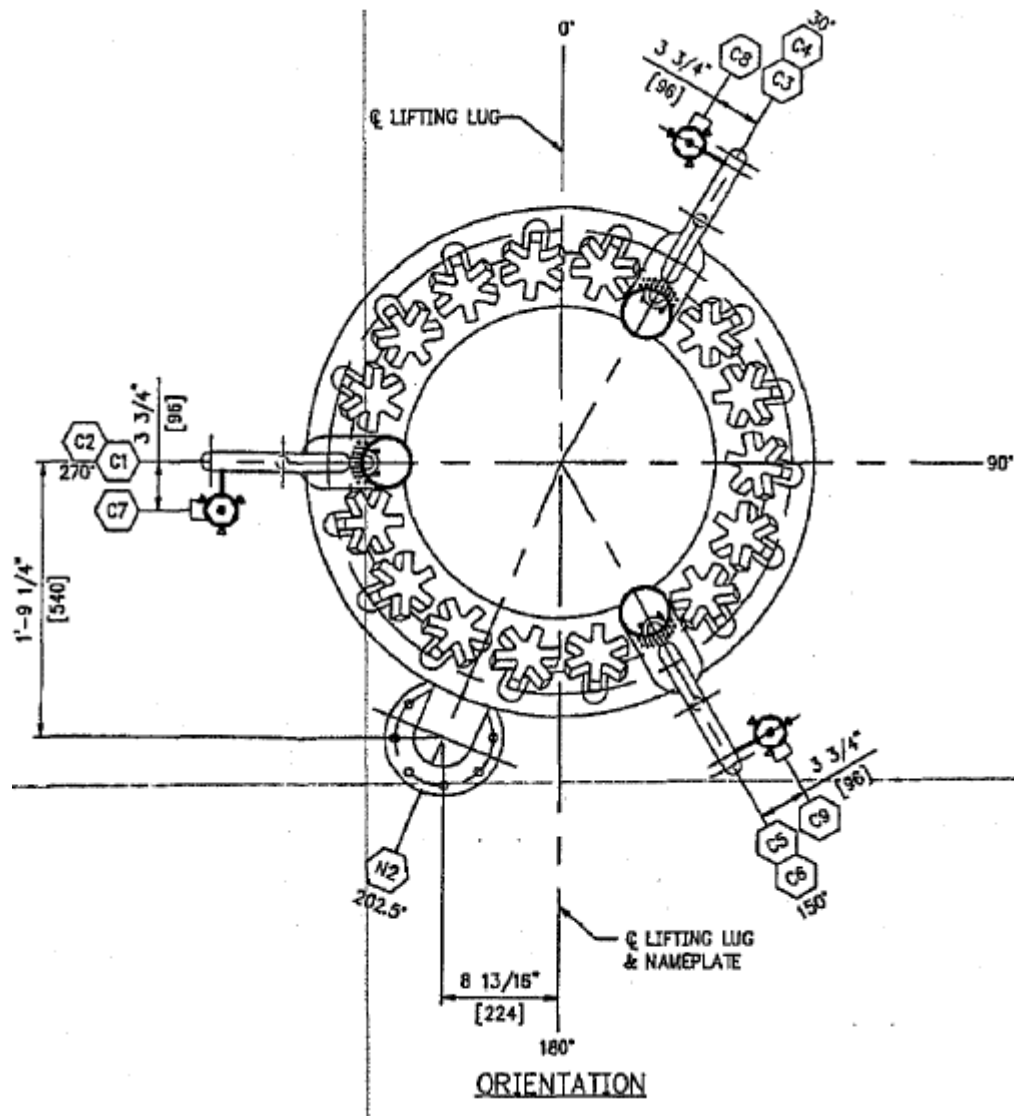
Typical Flare Tip Diagram (Elevation)⁶
